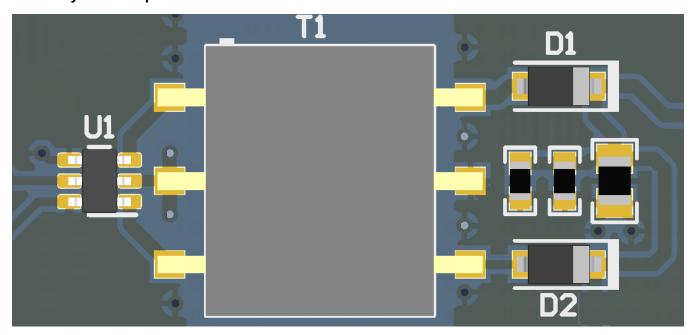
Layout Example of a 2-Layer Board (SN6505)
